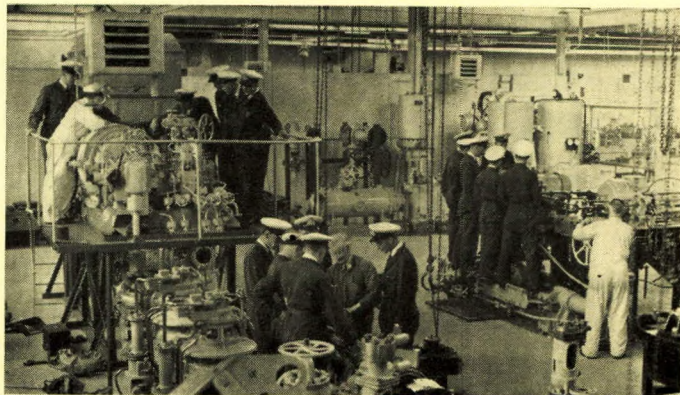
INSTRUCTION IN THE AUXILIARY MACHINERY STRIPPING BAY OF THE WORKSHOPS
